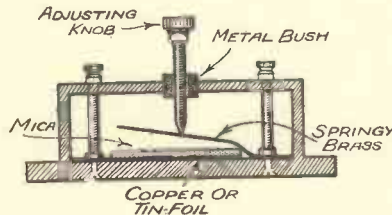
DETAILS OF A PRE-SET OR TRIMMER CONDENSER.
